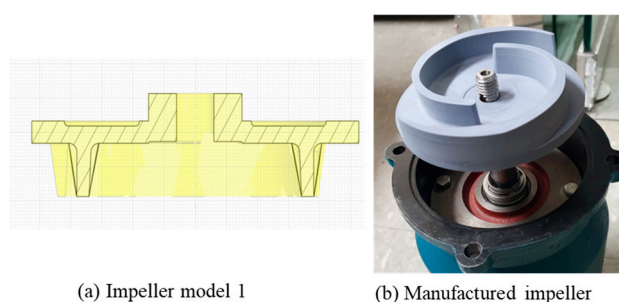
Cross-sectional view of the optimum model (a) impeller model 1 (b) manufactured model.
